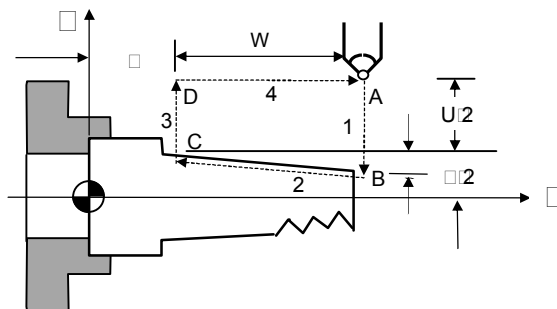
G92 Tapered Thread Cutting Canned Cycle
